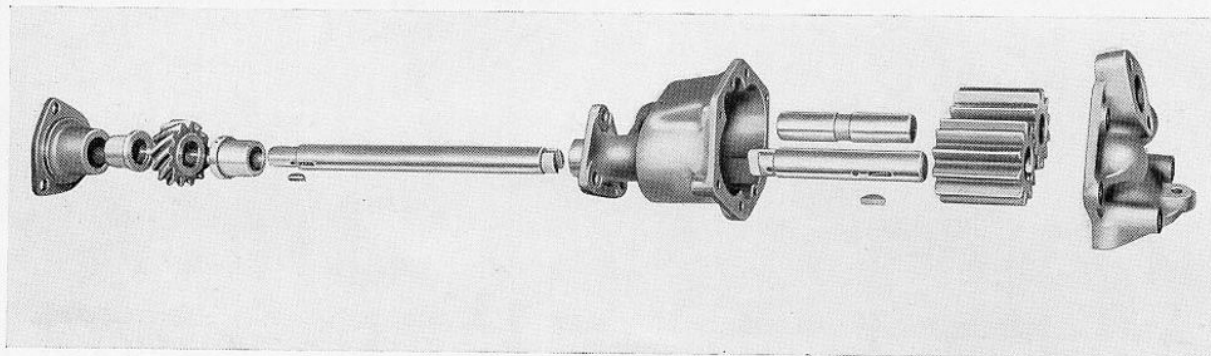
OIL PUMP AND DRIVE DISMANTLED
